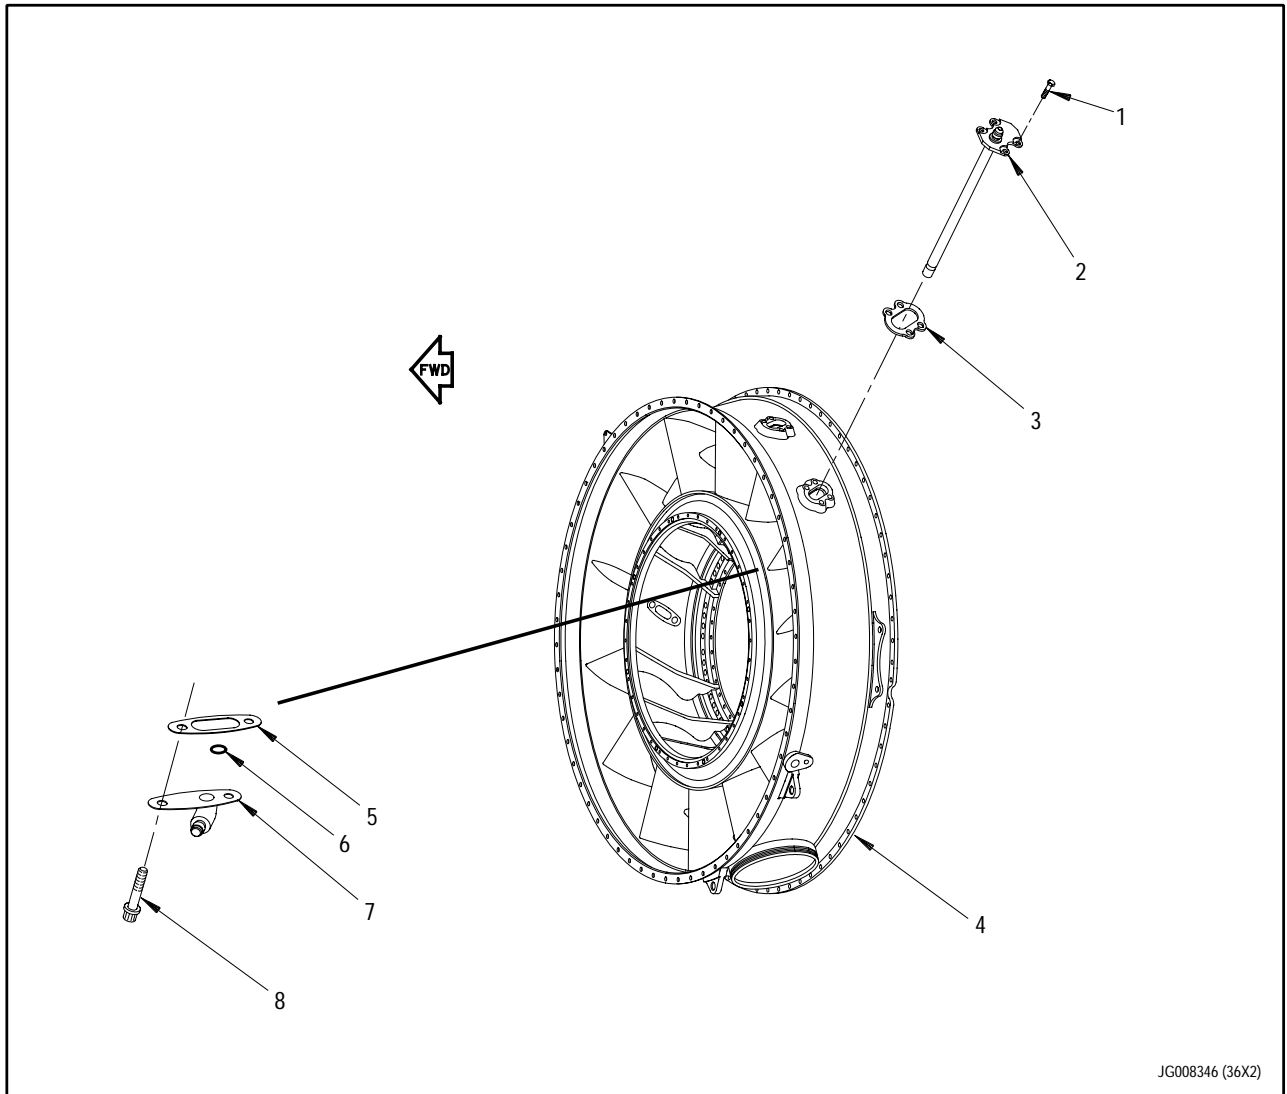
No. 3 Bearing Rear Seal Support and Internal Pressure Tube - Removal
